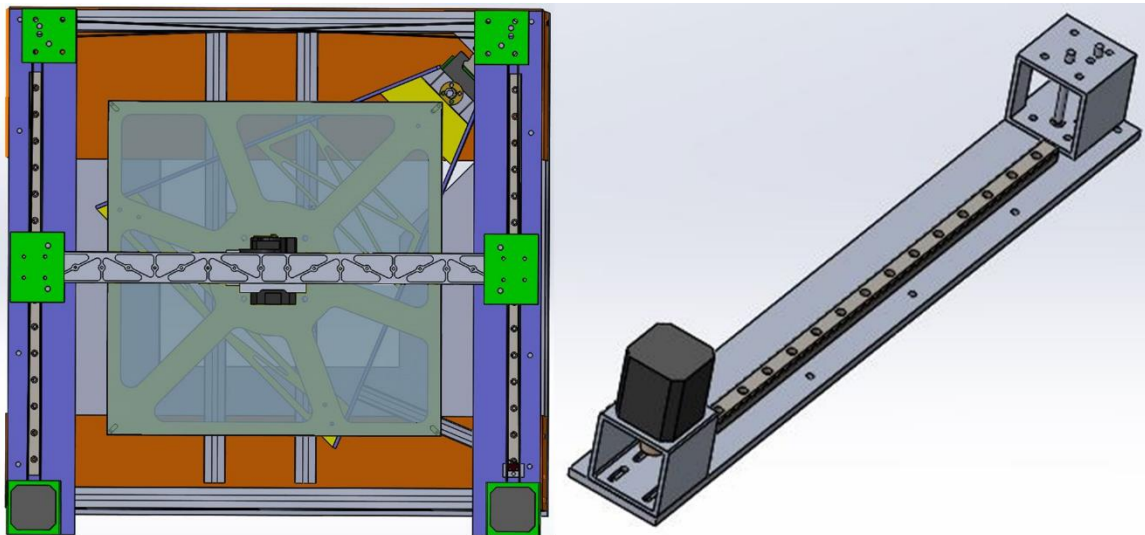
(Left) Alignment of both top plate assemblies on the printer frame and (Right) an assembly consisting of motor mount, pulley mount, and linear rail. This assembly keeps the relative alignment of the belt path constant during machine setup.
